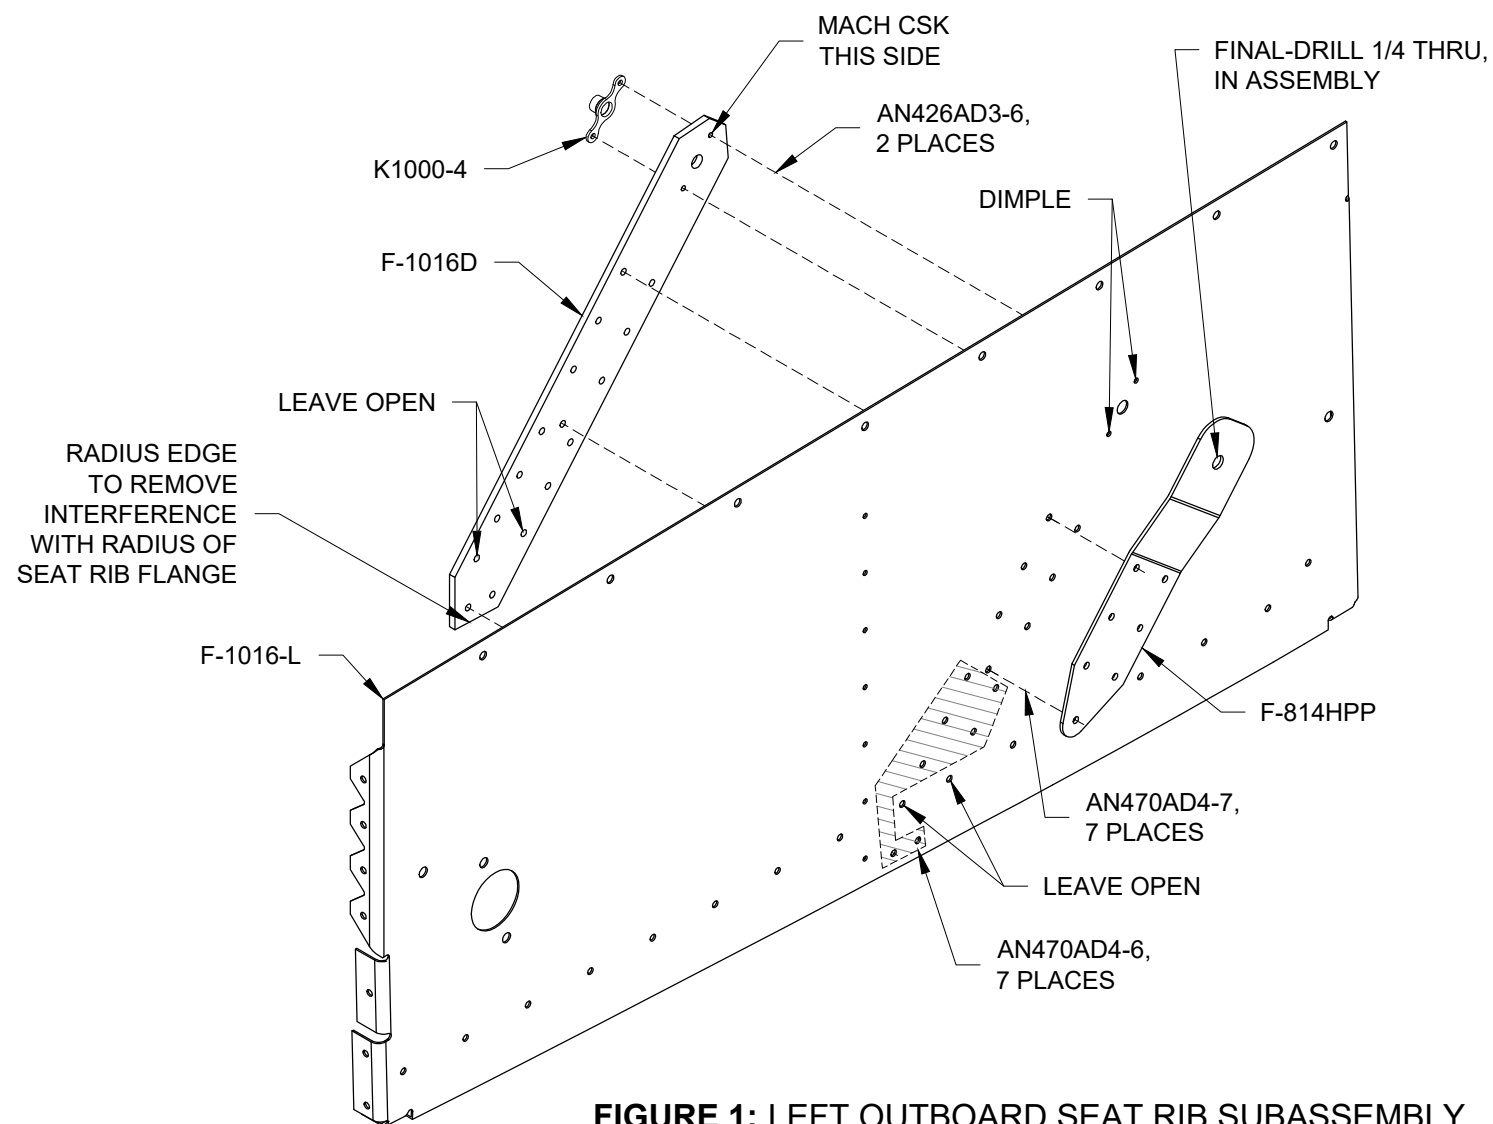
LEFT OUTBOARD SEAT RIB SUBASSEMBLY
